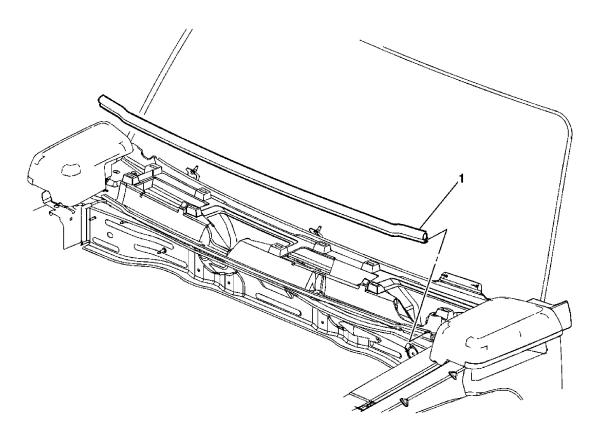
Hood Rear Seal Replacement Courtesy of GENERAL MOTORS CORP.
